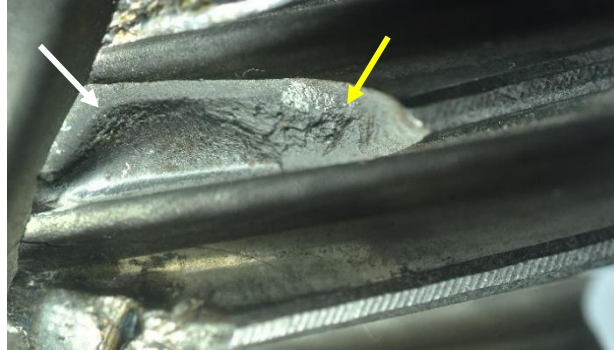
High magnification photograph of the fracture surface of the failed gear tooth.
